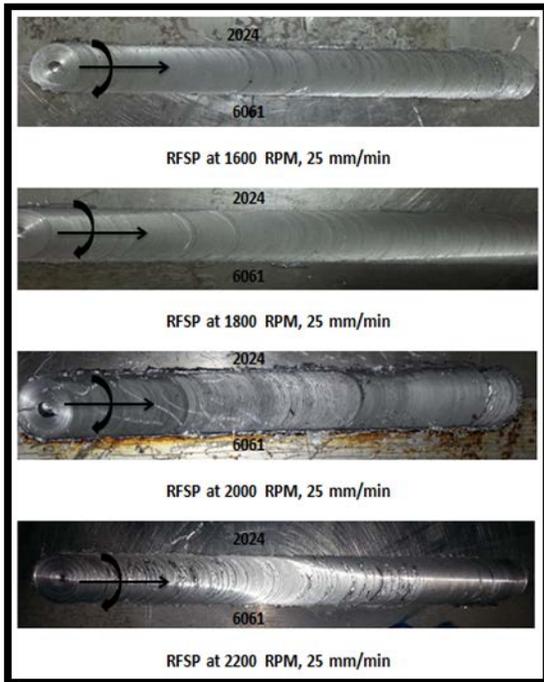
surface of welding line for all (RFSP) specimens
